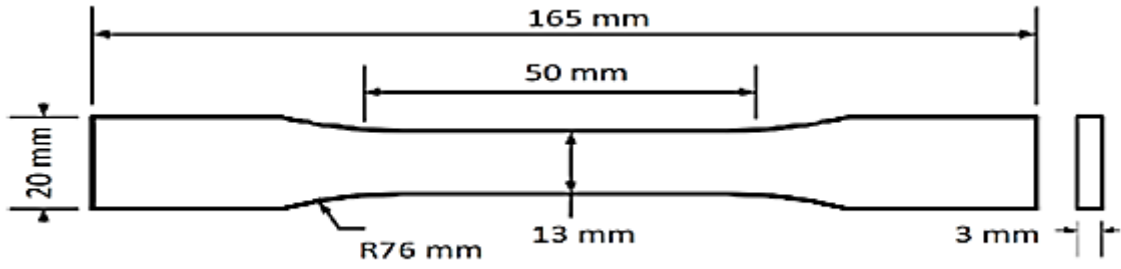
Scheme Shows the epoxy mold and dimension sample according to standard ASTM D638[62].
